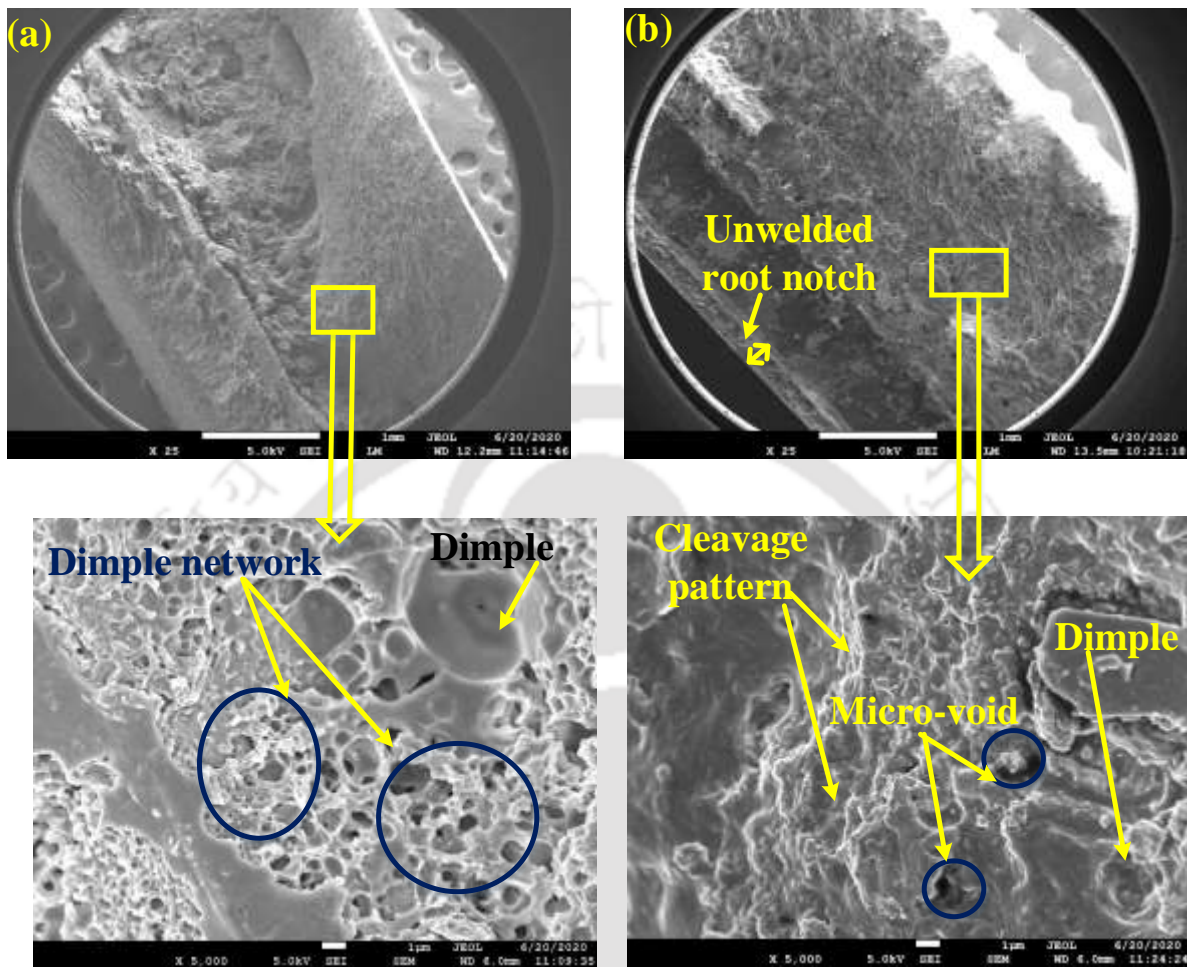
SEM fractography of an impact-tested welded sample (a) Weld 3 and (b) Weld 5.
